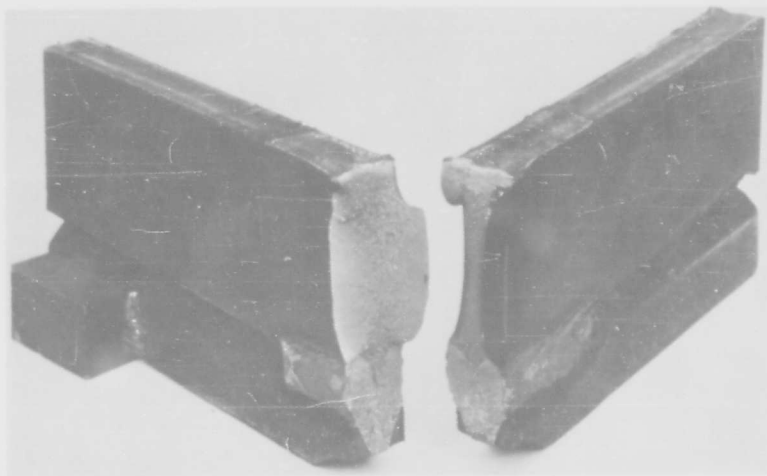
Fracture appearance of DWTT specimen representative of a material of high fracture toughness - HY-80 steel sample tested in the "strong" direction
